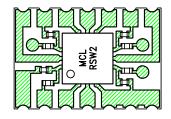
Test Board TB-23A+ includes case connectors & components soldered to PCB. C1, C2, C3=0.1µF, 0805 size
